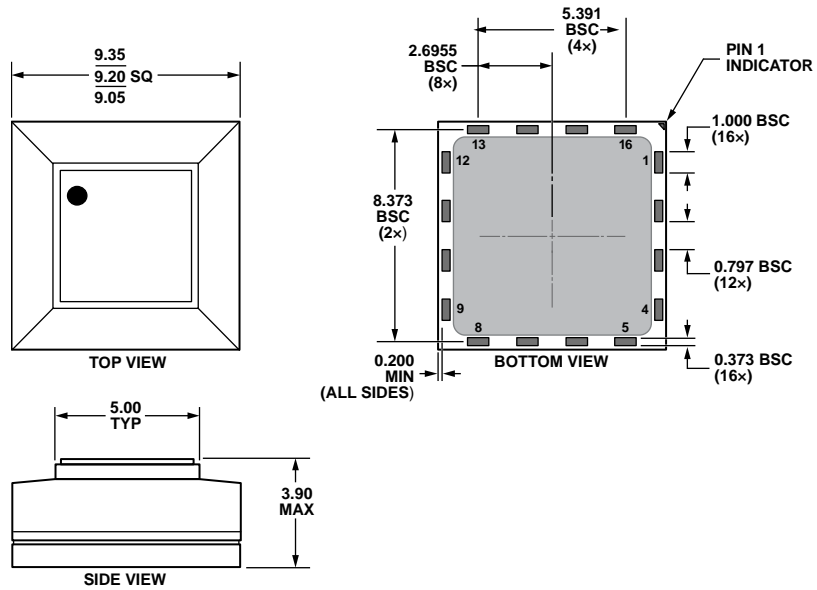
16-Terminal Stacked Land Grid Array [LGA]
